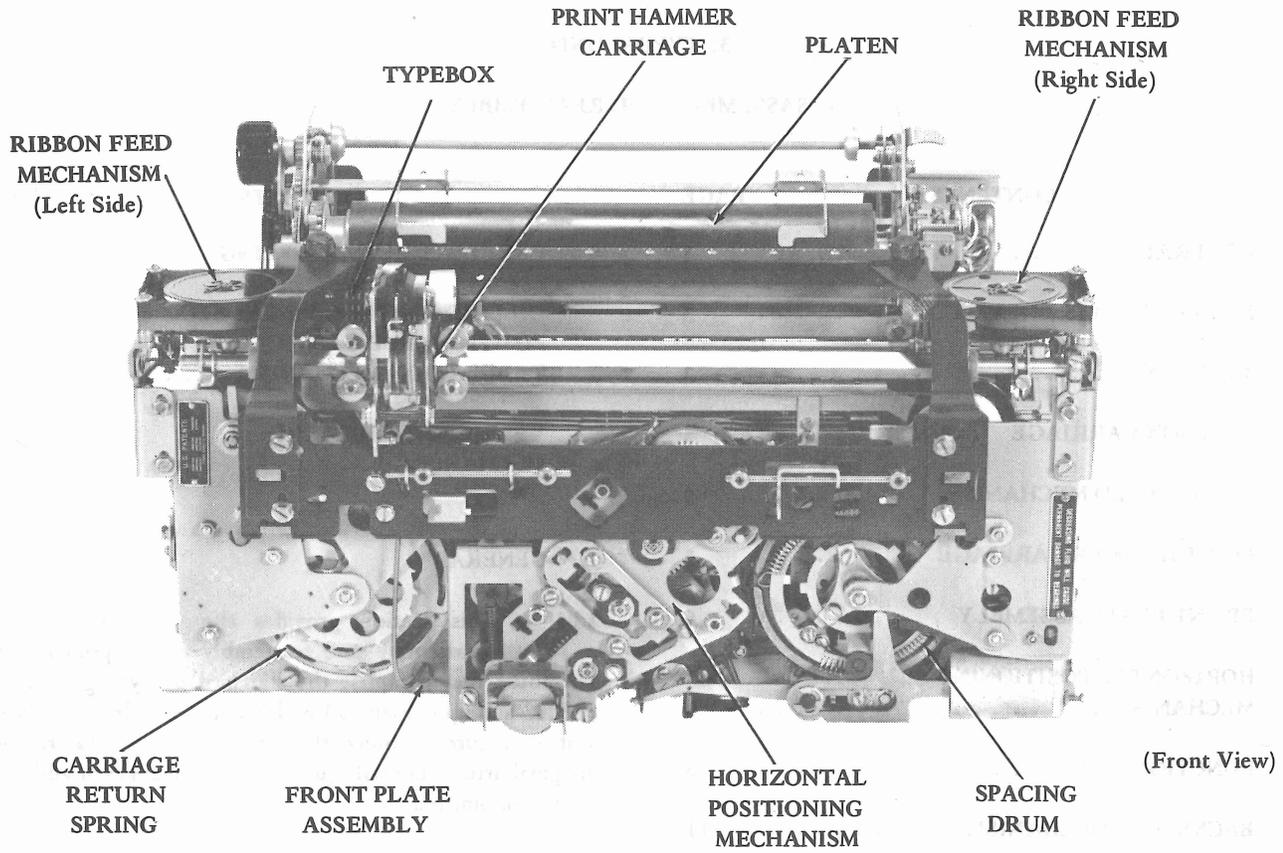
37 Standard Typing Unit (Friction Feed)
